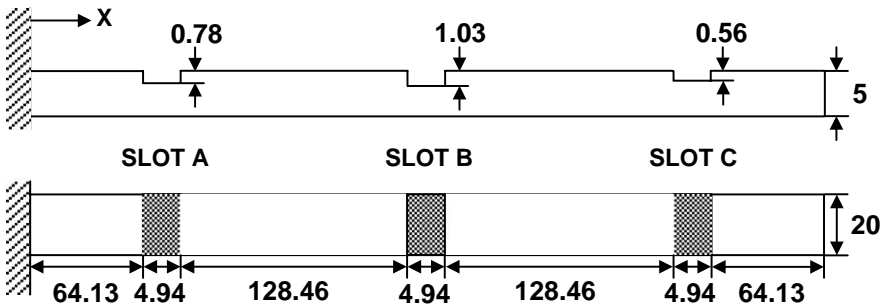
Geometry of a cantilevered beam specimen with three slots (units: mm)
